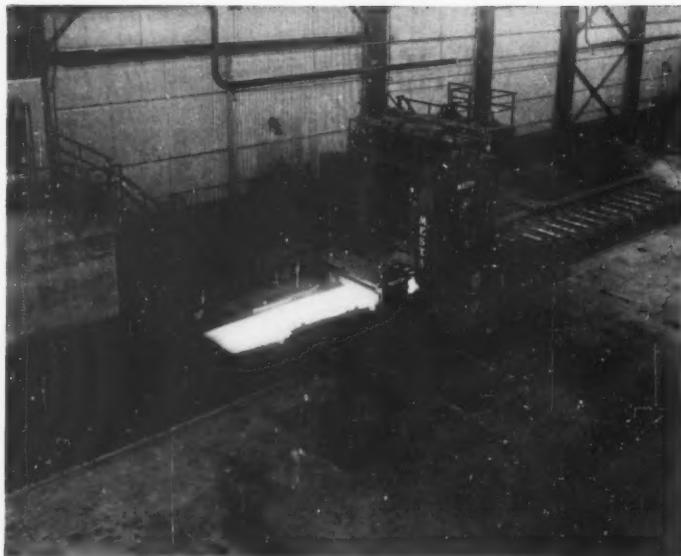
, typical of modern steel mill machinery is this 4-high universal stand of a continuous hot strip mill.
